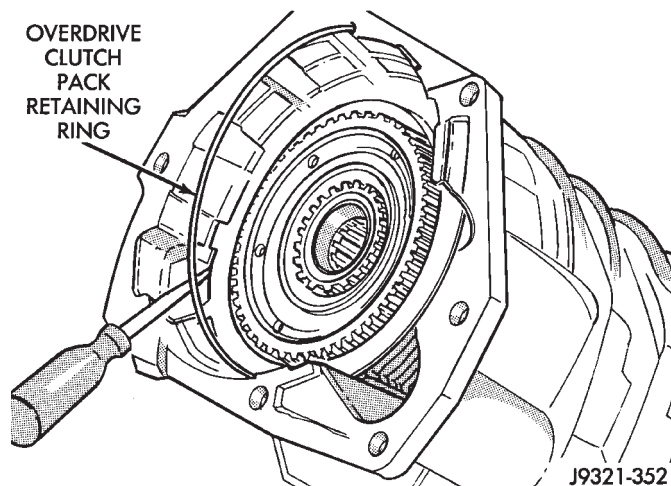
Overdrive Clutch Pack Retaining Ring Installation
